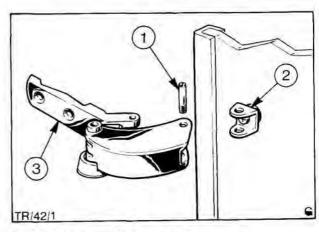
Catch assembly to glass bracket 1 - Headless pin, 2 - Bracket; 3 - Catch
